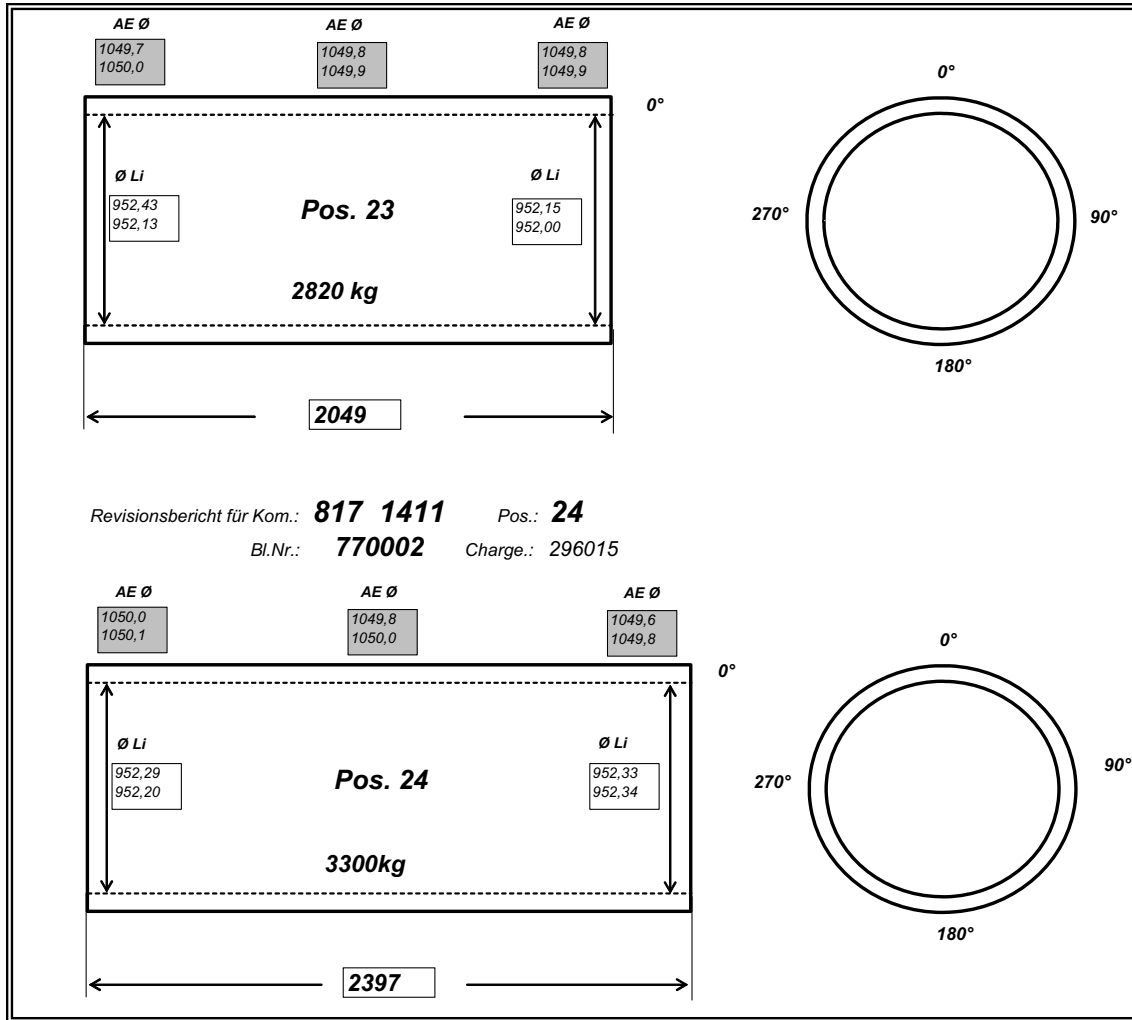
The dimensional control results of the parts of the T55 cylinder after machining.
